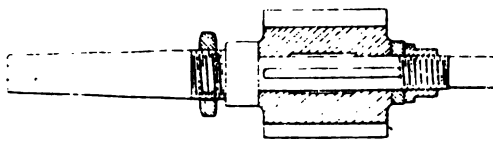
Cutter held on Arbor with Nut, Arbor forced out of its Hole with a Nut.
